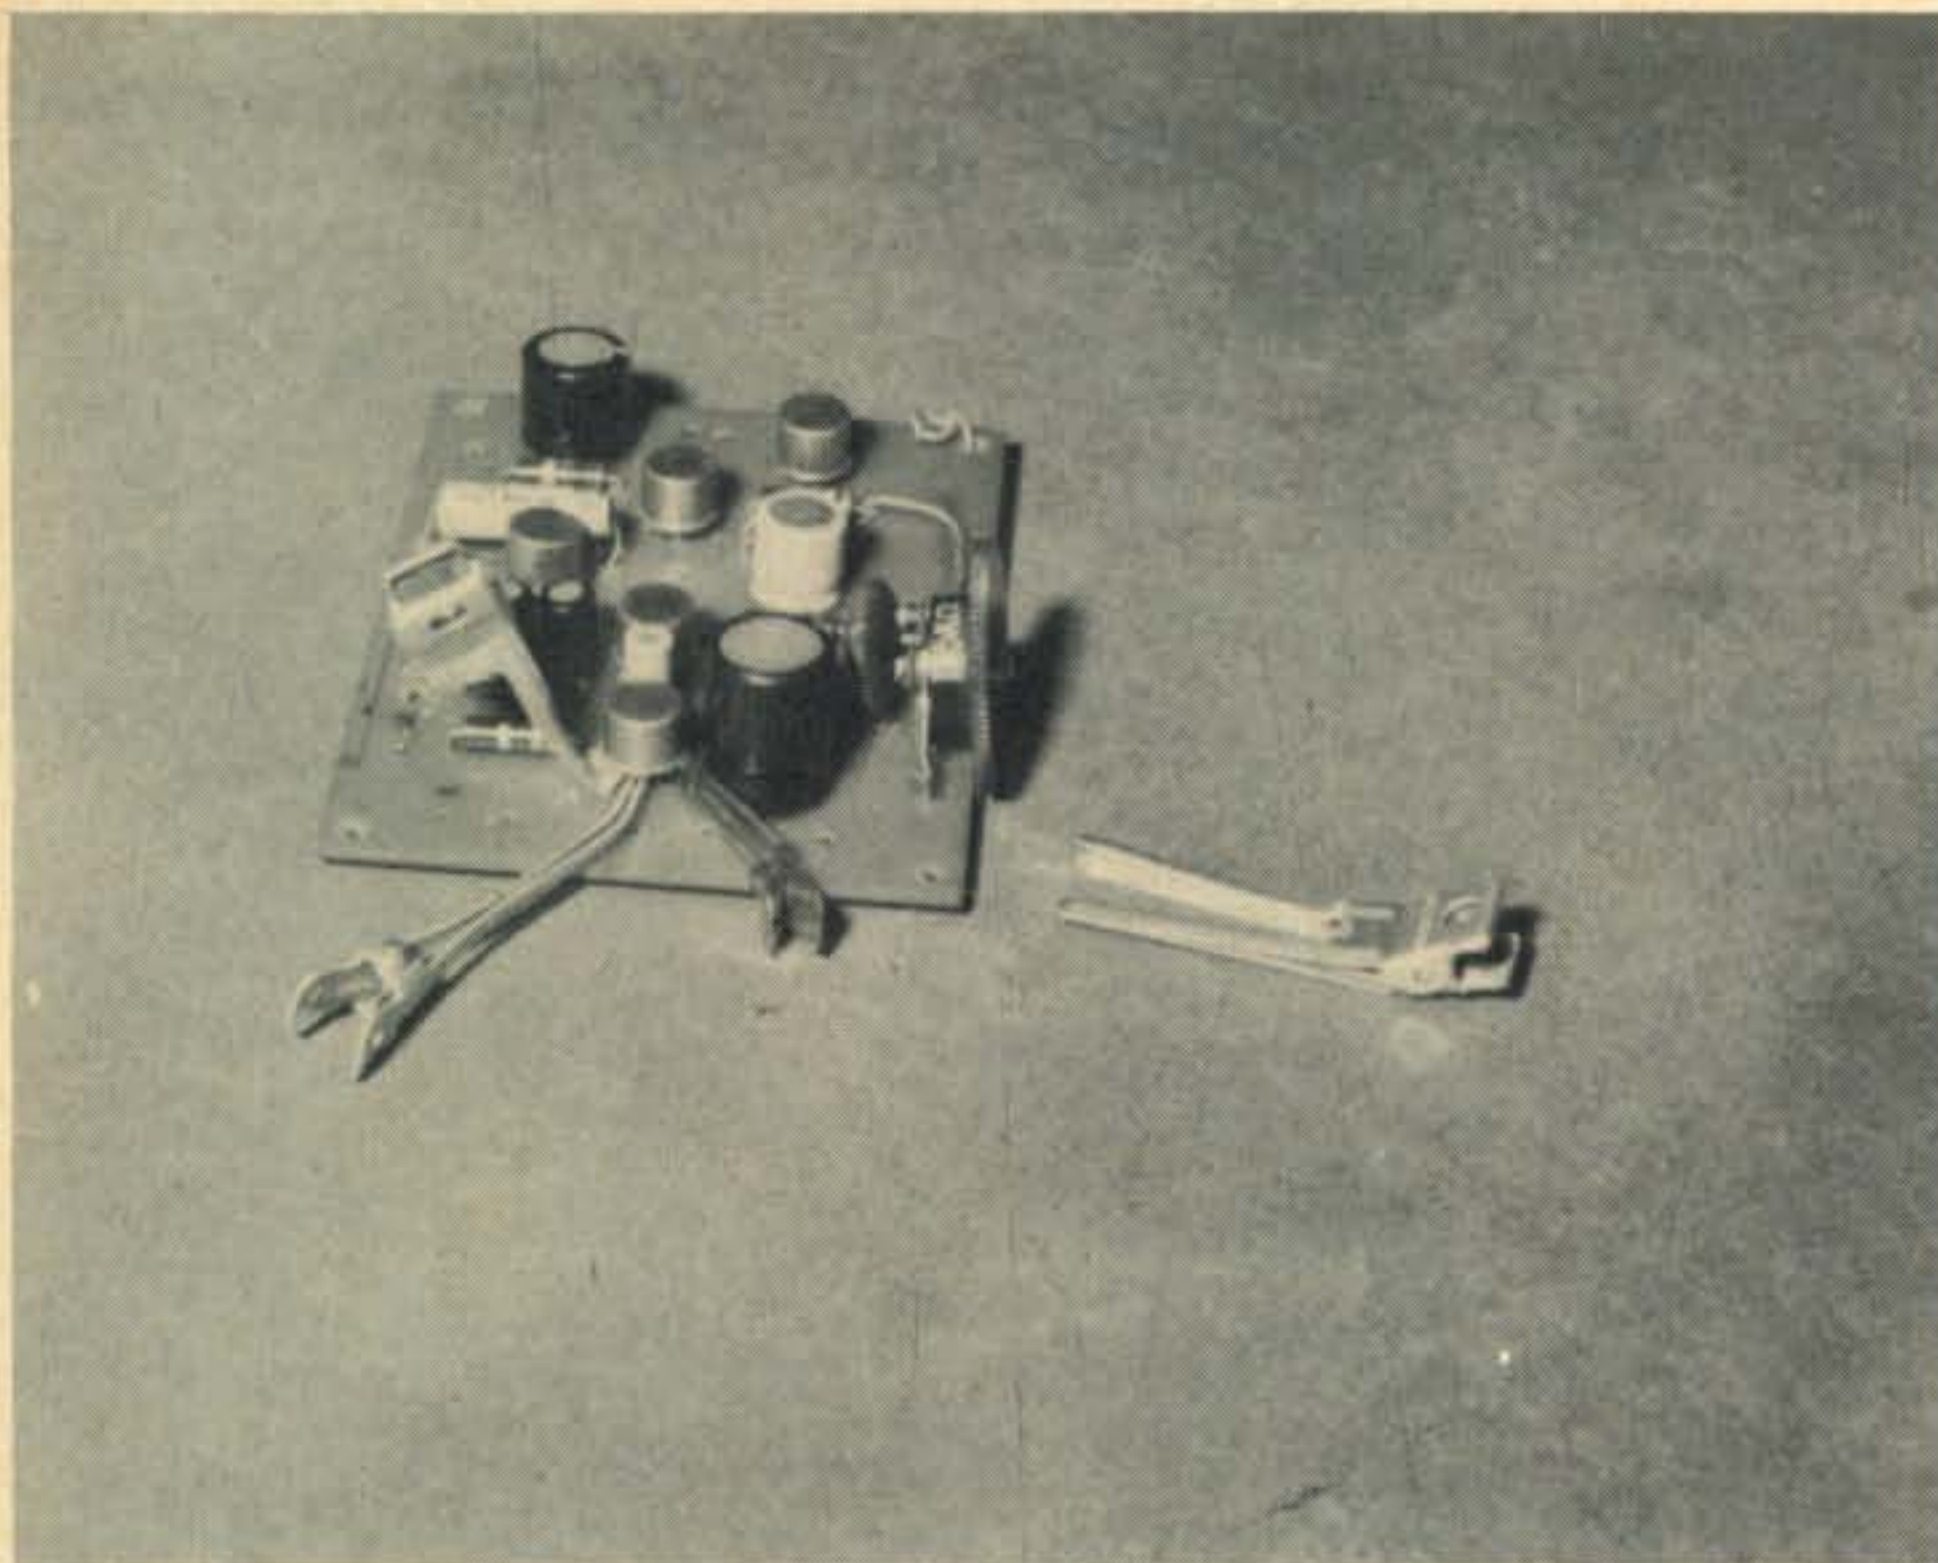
Insert the parts according to the circuit layout and solder them down using a very light duty soldering iron (25 to 35 watts). Heat sensitive components must have a *heat sink* to prevent damage. The heat sinks shown are aluminum and can be bent to fit a confined space.
